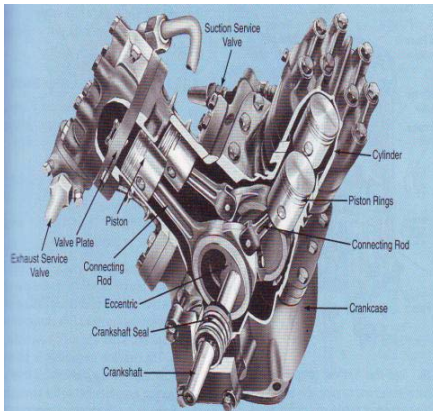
A four-cylinder, external-drive, V-type, air-cooled compressor. (Frick Co.)
